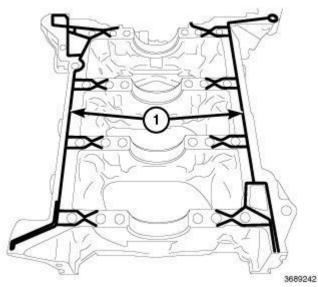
RTV Sealant Compound On Bed Plate Courtesy of CHRYSLER GROUP, LLC
